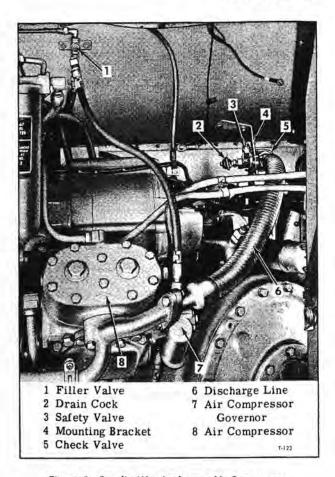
Bendix-Westinghouse Air Compressor and Discharge Line Installation
